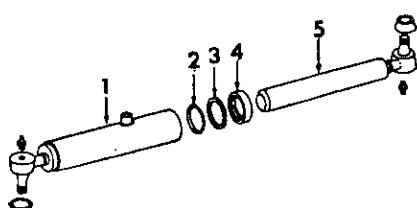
Exploded view of a single acting cylinder used on Series 424, 444, 2424 and 2444 equipped with standard adjustable front axle or heavy duty non-adjustable front axle.
